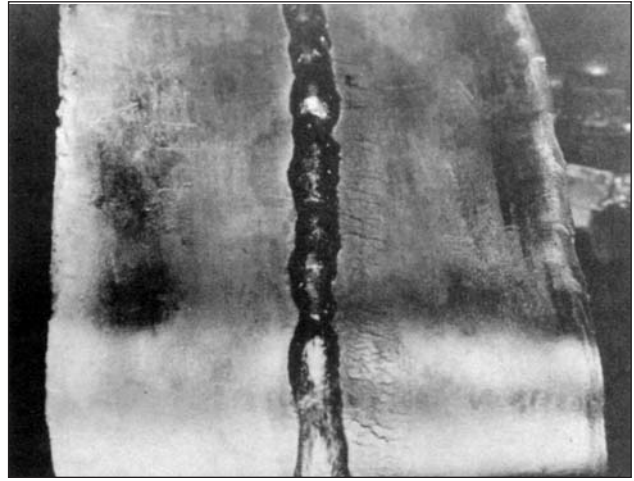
Sulfur embrittlement of root bend in Nickel 200 sheet. Left side of joint cleaned with solvent and clean cloth before welding; right side cleaned with solvent and dirty cloth exhibits cracking.
